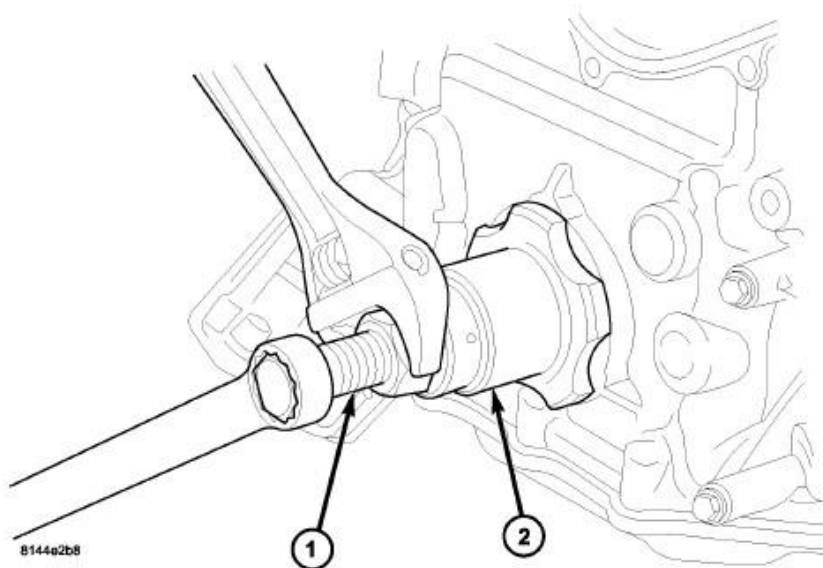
FRONT CRANKSHAFT SEAL REMOVAL
